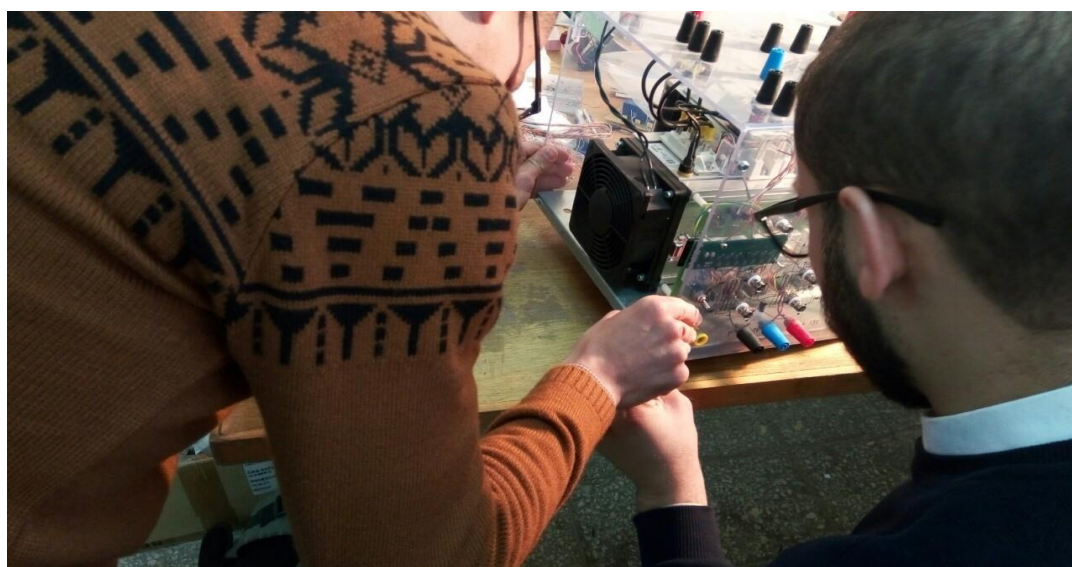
Welding the PWM cards and place them in the inverters
